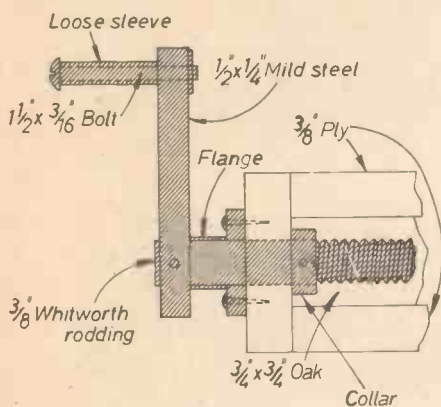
Section of front of base showing fitting of handle and Whitworth rod for engaging oak block in sliding platform.
